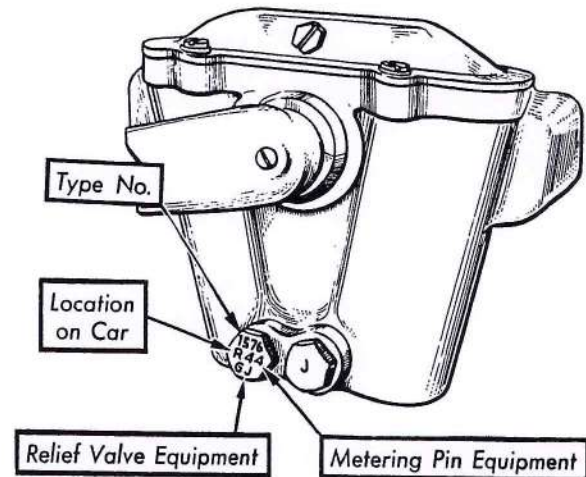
These markings indicate the metering pin and relief valve equipment when the car was shipped.
